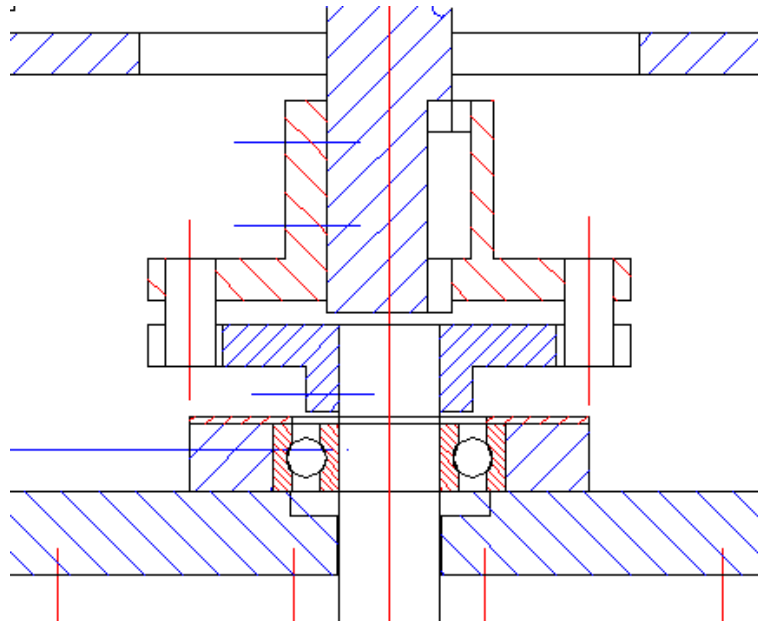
Clutch between the rotor and the motor. The radial roller bearing is of 6001 type.
